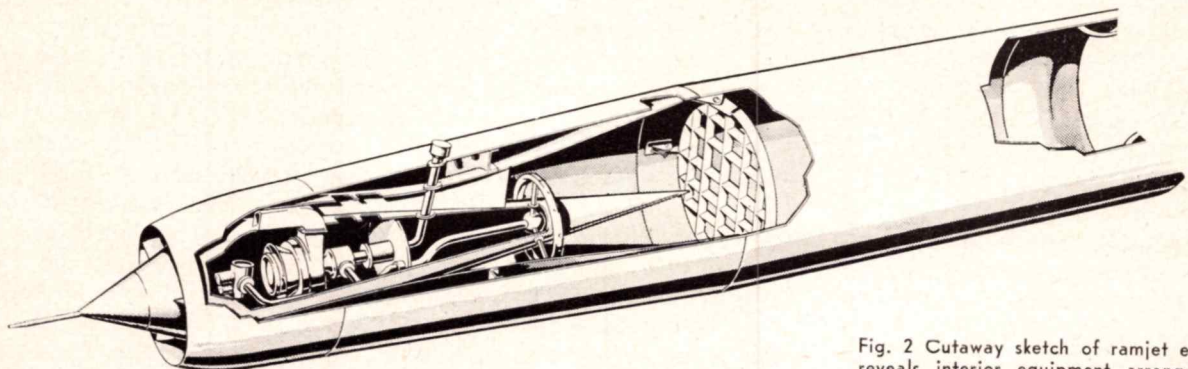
Cutaway sketch of ramjet engine reveals interior equipment arrangement
